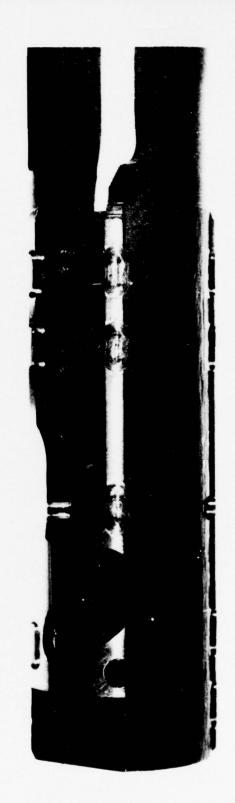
Left Side View of Bolt Carrier Showing Holes for Composite Inserts.
